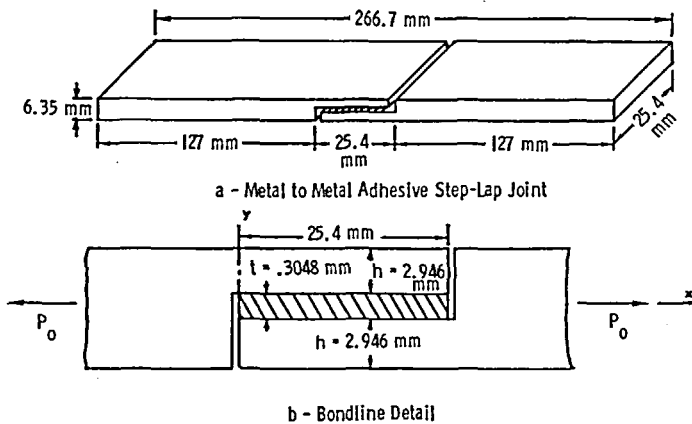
Step-lap joint test specimen (SI conversion: 25.4 mm = 1 in).
